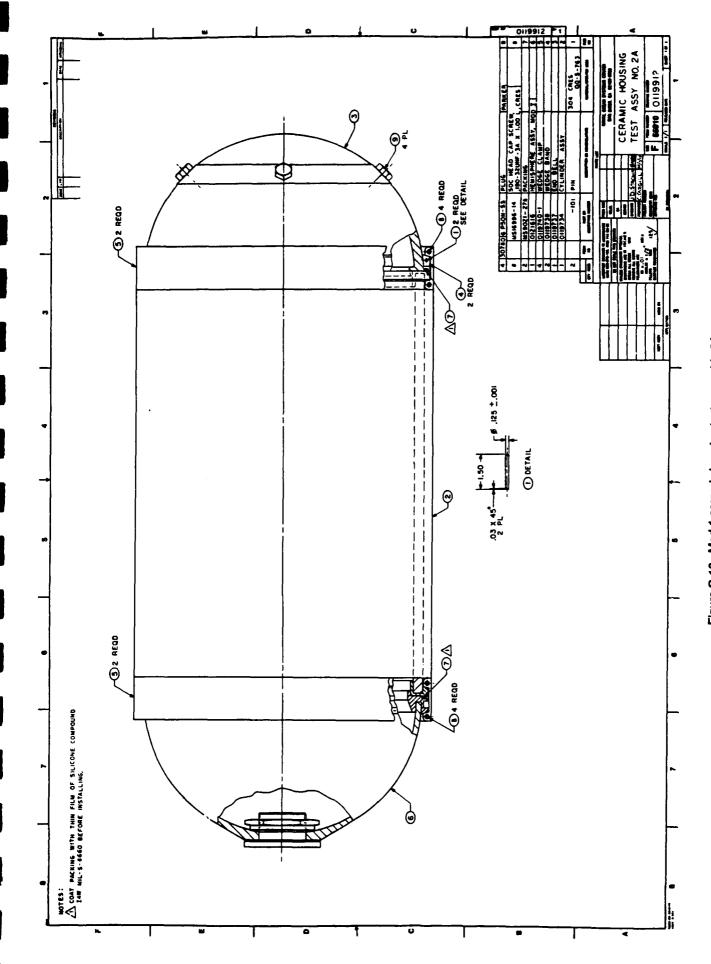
Mod 1 ceramic housing test assembly 2A.
